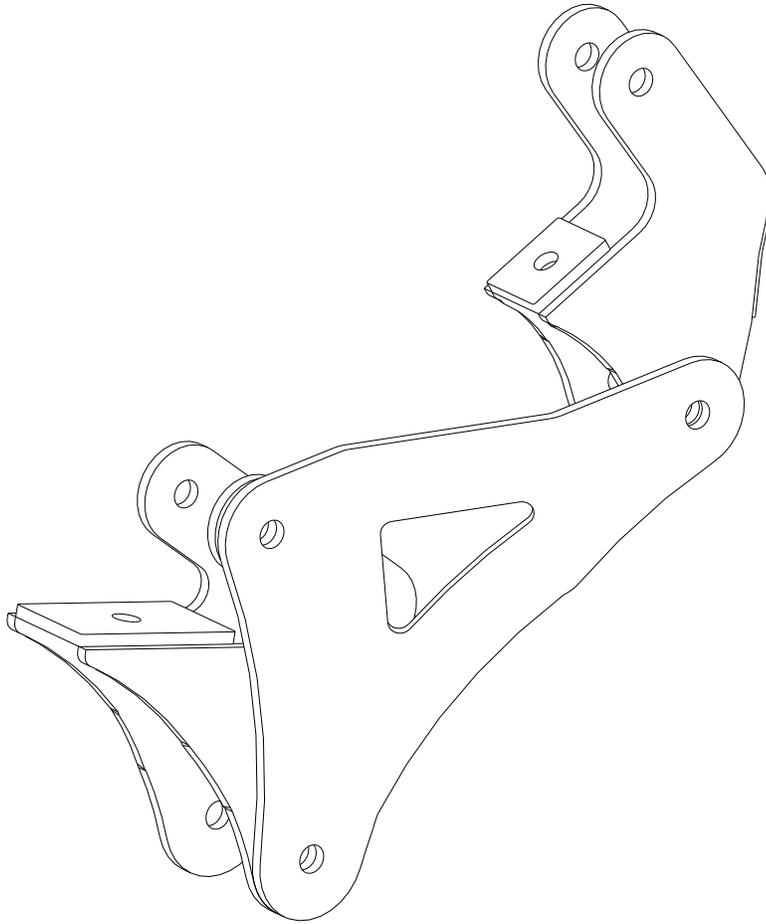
Driver side control arm re-location brackets. ← Front of vehicle
